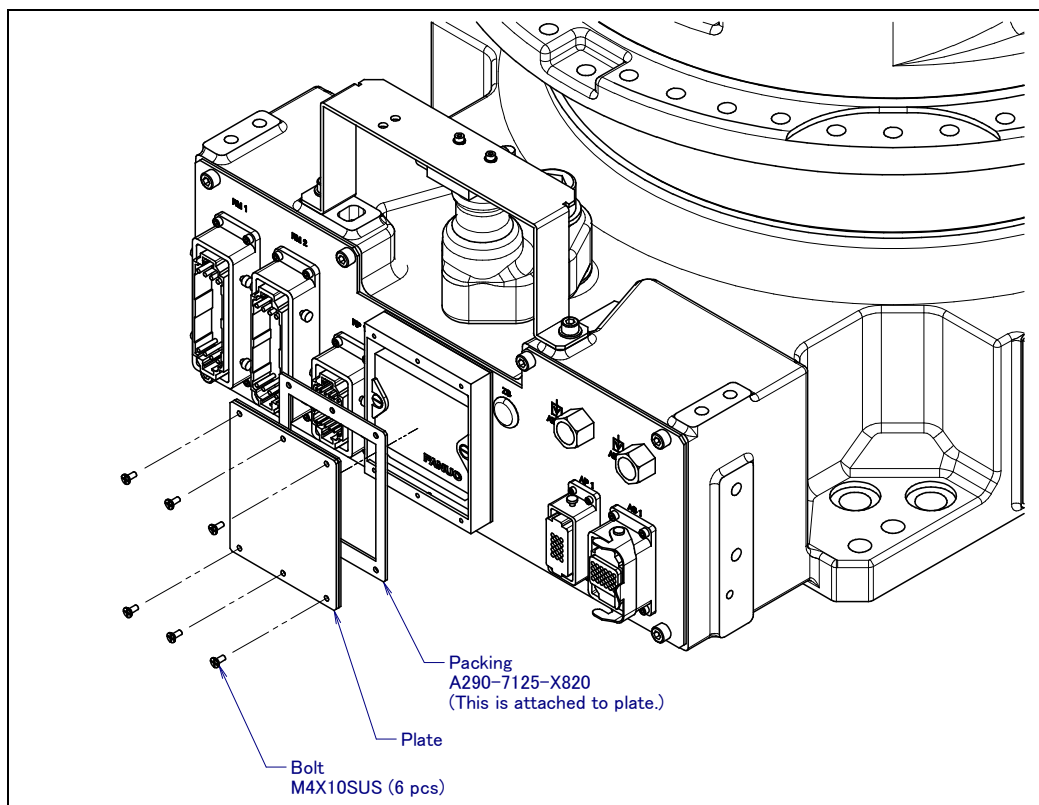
(b) Removing the battery cover plate (When severe dust/liquid protection is specified.)
